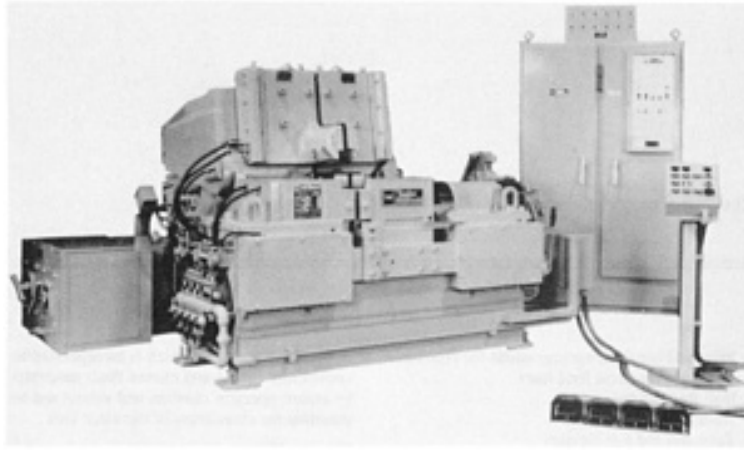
FLASH-WELDING MACHINE WITH CAPACITY TO WELD RINGS UP TO 4.6 M (15 FT) IN DIAMETER
